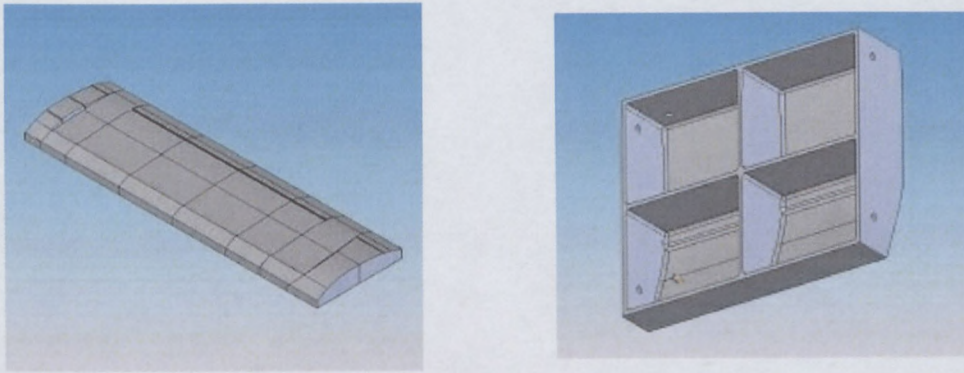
Wing mould divided into 16 pieces (left), one of the individual mould pieces (right).
